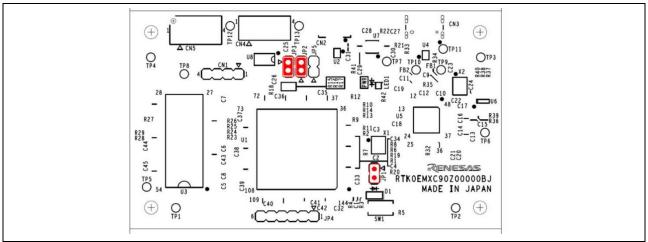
Jumper Pin Assignment on Board - Communication Board
